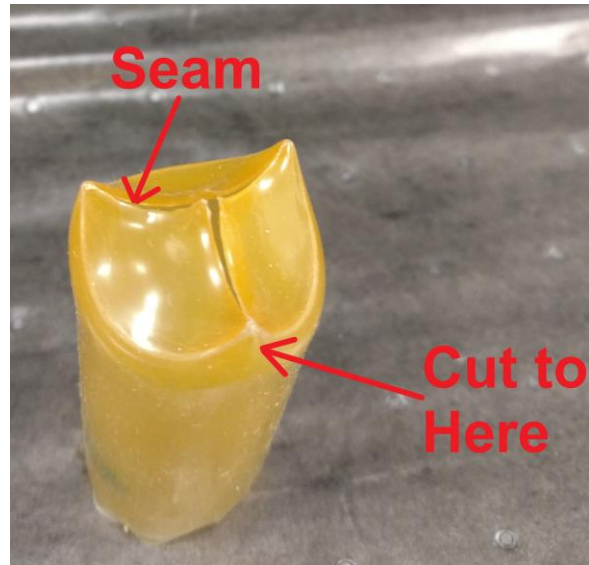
A CCSD valve with leaflets cut free labeled with the cutting seam and the distance to cut past the valve corner.
